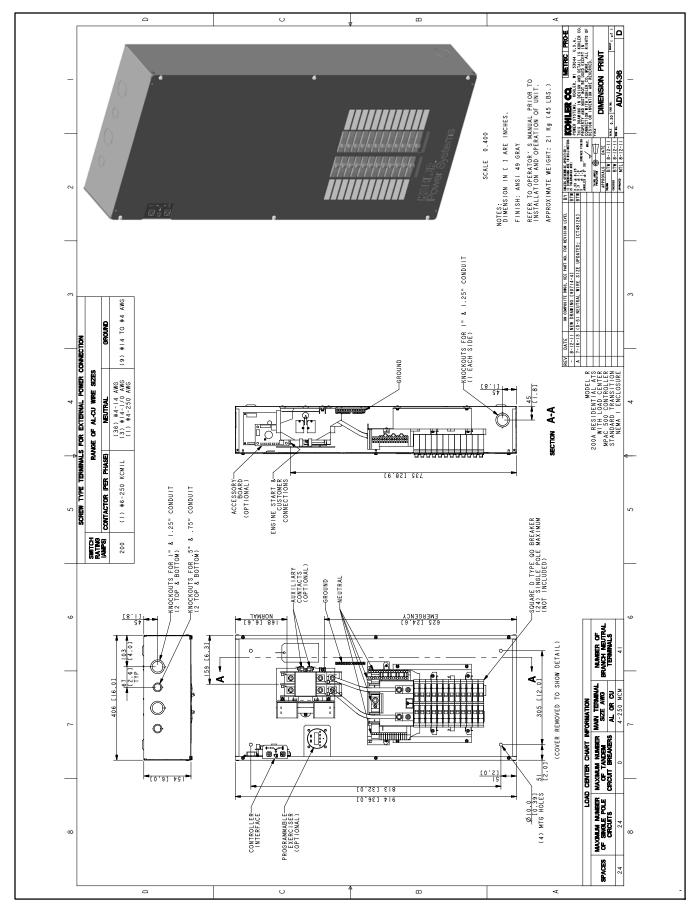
Dimension Drawing, 200 Amp NEMA Type 1 Enclosure with Load Center, ADV-8436
